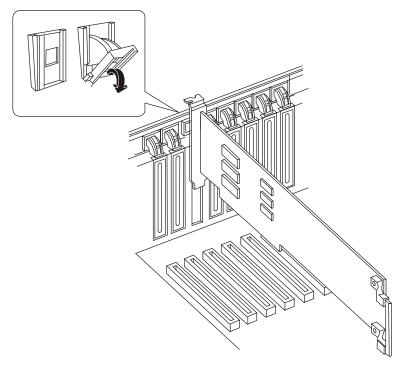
Open the PCI PHP Mechanism Securing the Board at the Rear of the Chassis
